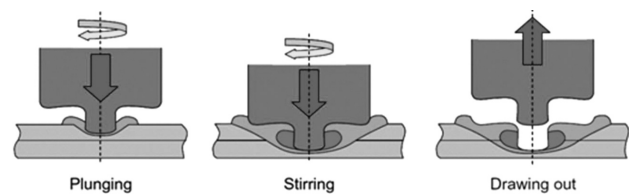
Schematic illustration of the friction-stir spot-welding process
